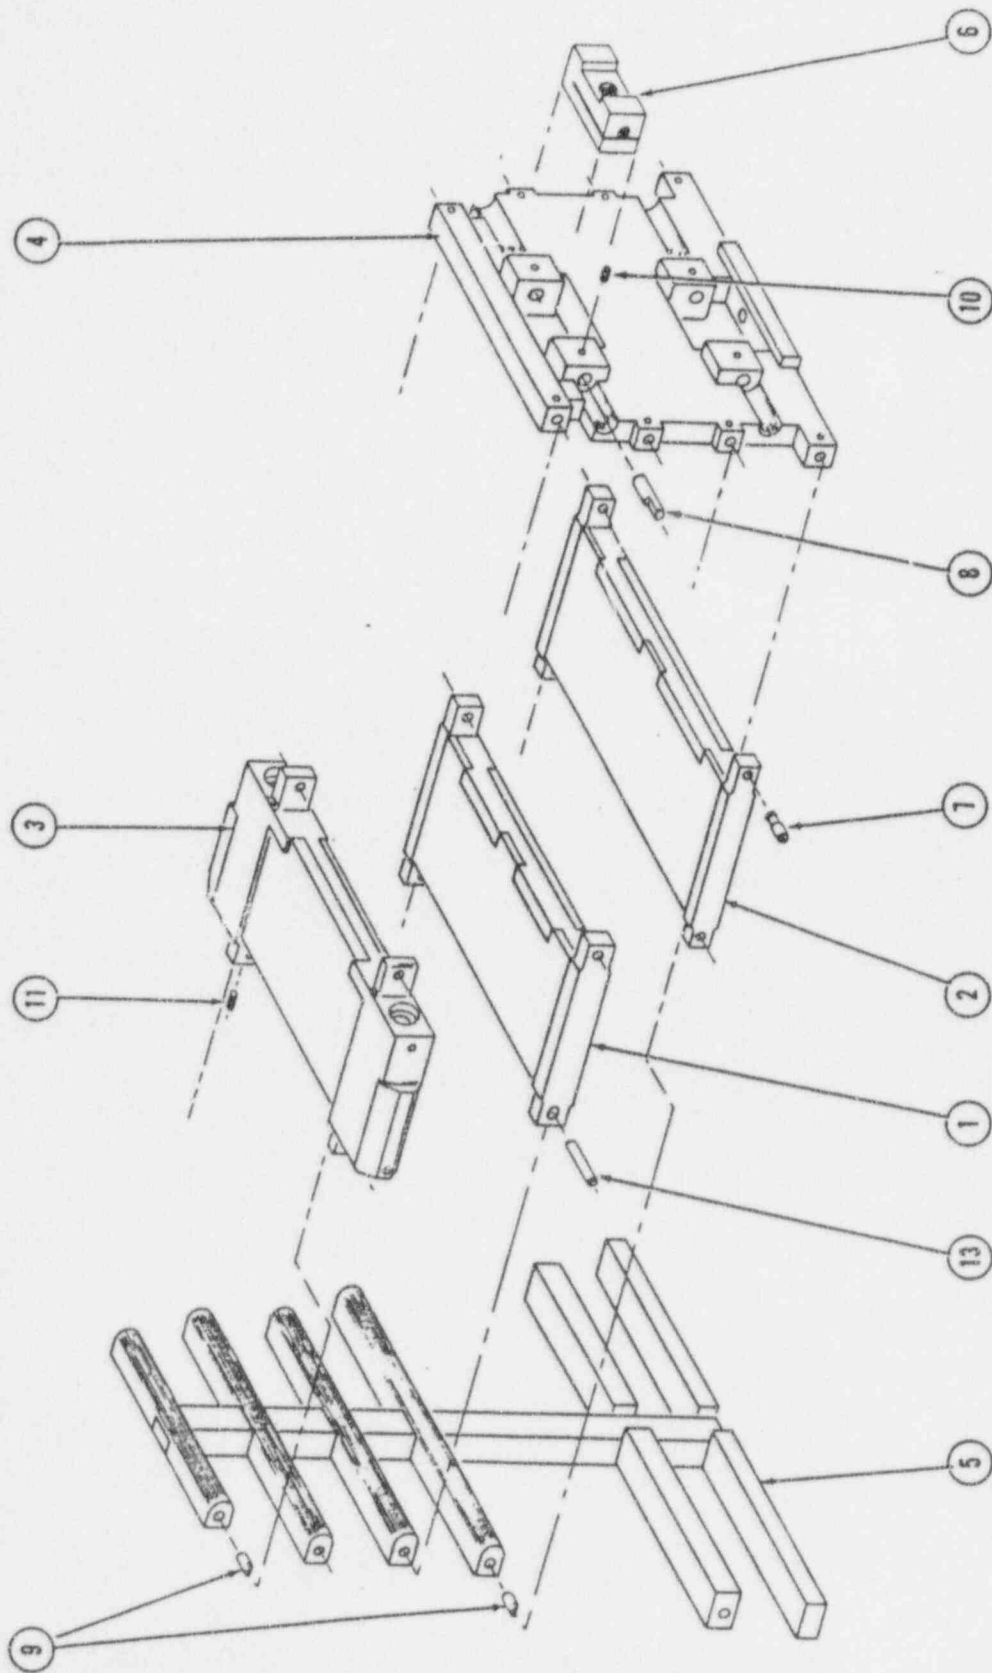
REAR PLATE ASSEMBLY - Part No. 182277A
